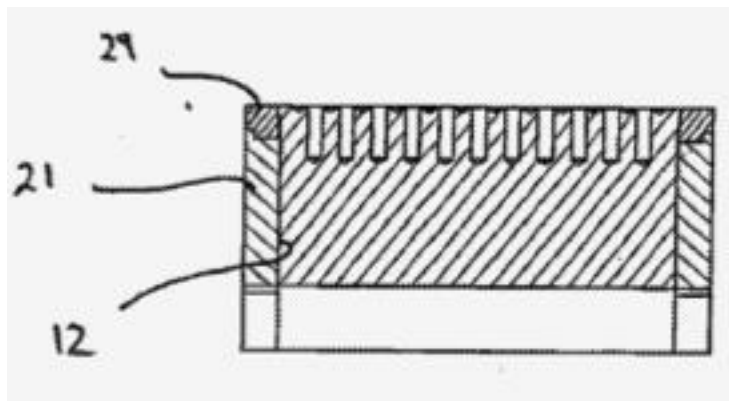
Figure 4 from AU2015203343 showing a cross-sectional side view of an HPGR roll with the Hofmann edge protection assembly.
